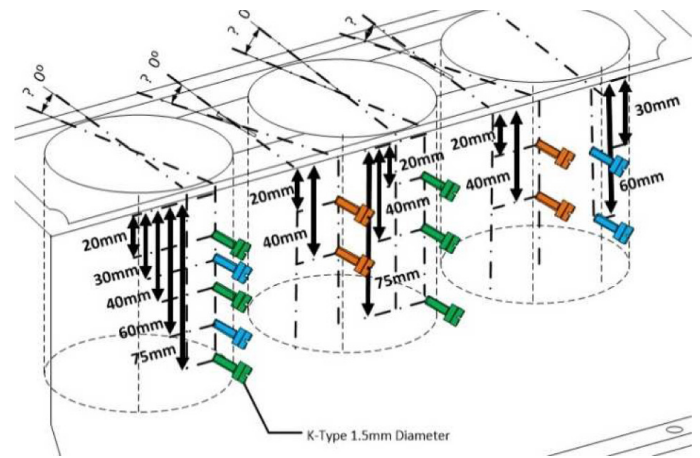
Thermocouple configurations for the block metal (green thermocouples), inter-bore (orange thermocouples) and coolant (blue thermocouples).
